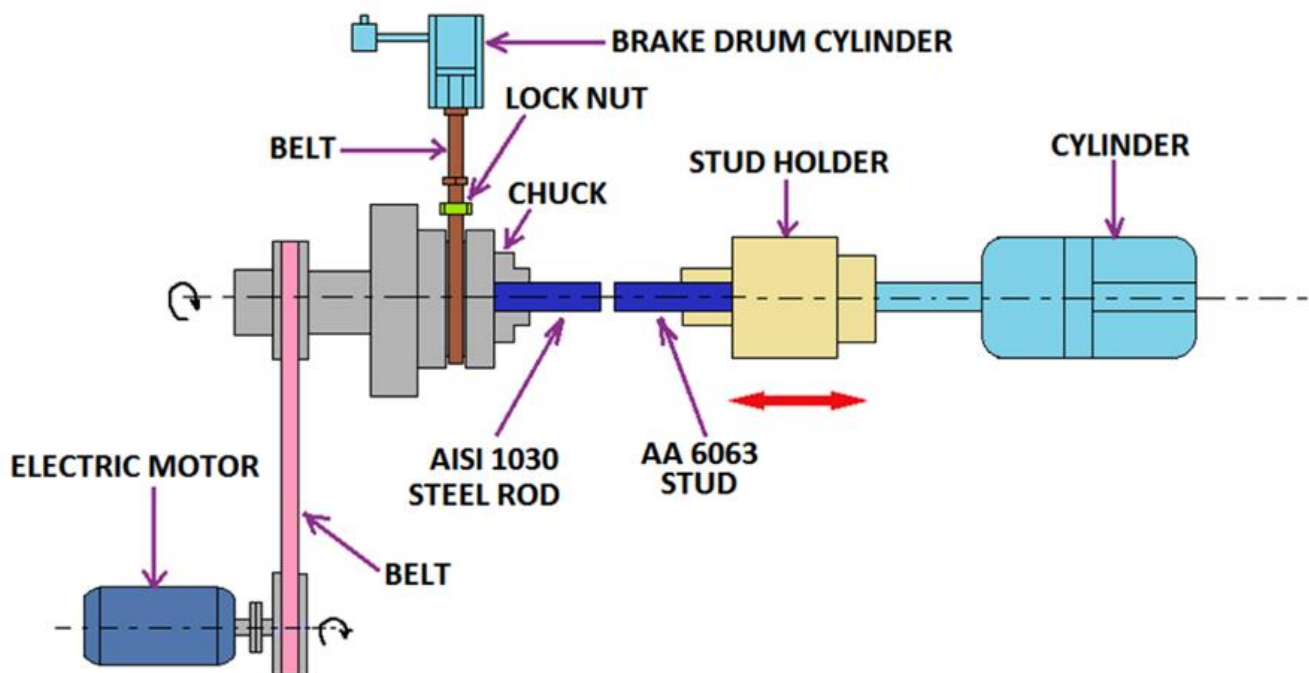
Schematic diagram of Friction stud welding process.
